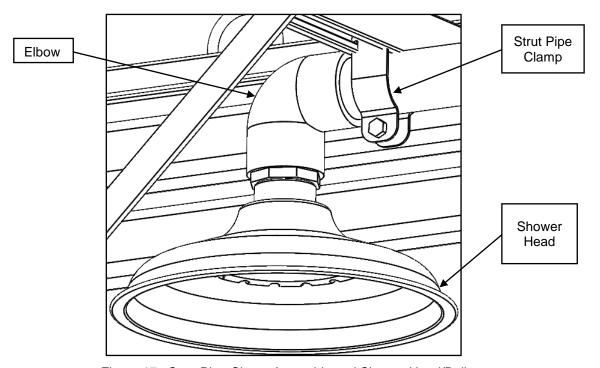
Strut Pipe Clamp Assembly and Shower Head/Bell
